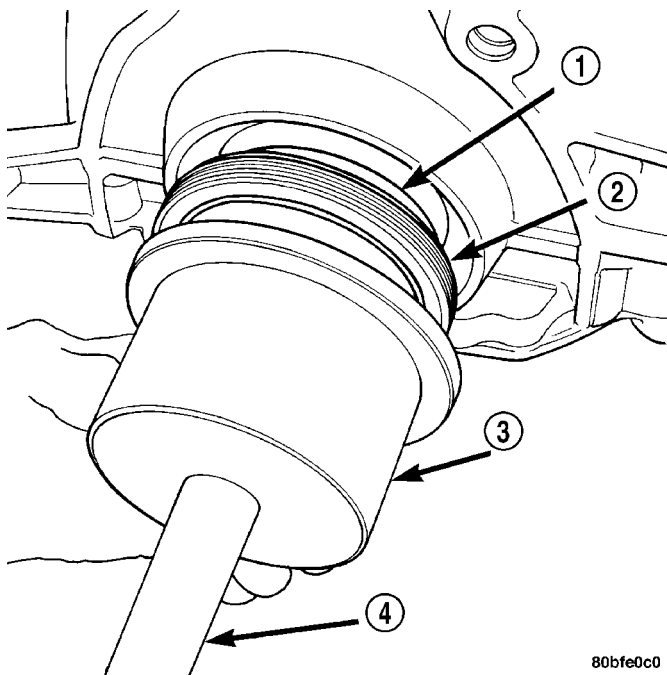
Crankshaft Seal and Special Tools 6926-2 & C-4171
